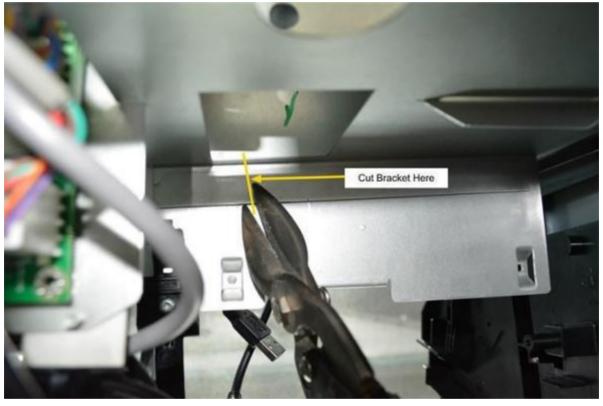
Cutting point on lower metal plate, behind Payment Controller Board
